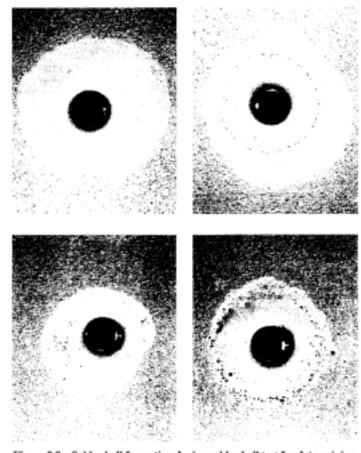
Solder ball formation during solder ball test for determining the suitability of solder paste. No solder ball (top left) is preferred, but a minor occurrence of very fine solder balls (top right) is also acceptable. Clustered solder balls (bottom left) and a solder ball halo ring with numerous solder balls (bottom right) are unacceptable [1].
